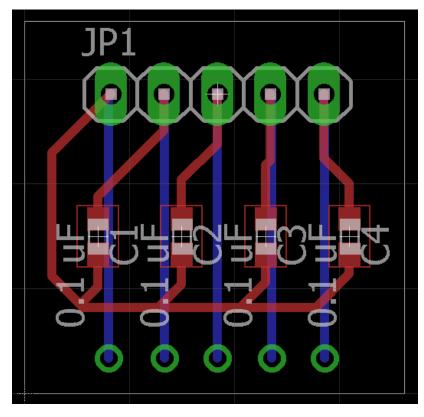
The Layout for ADXL325 Accelerometer Interface PCB (1.8 cm \times 1.7 cm with 5-mm grid on).
